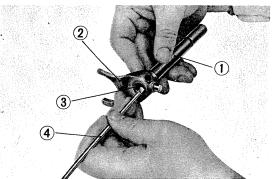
① Shift fork guide shaft ② L shift fork ③ 4×10 roller ④ Screwdriver
